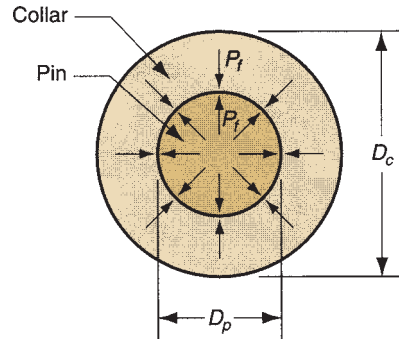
Cross section of a solid pin or shaft assembled to a collar by interference fit.
